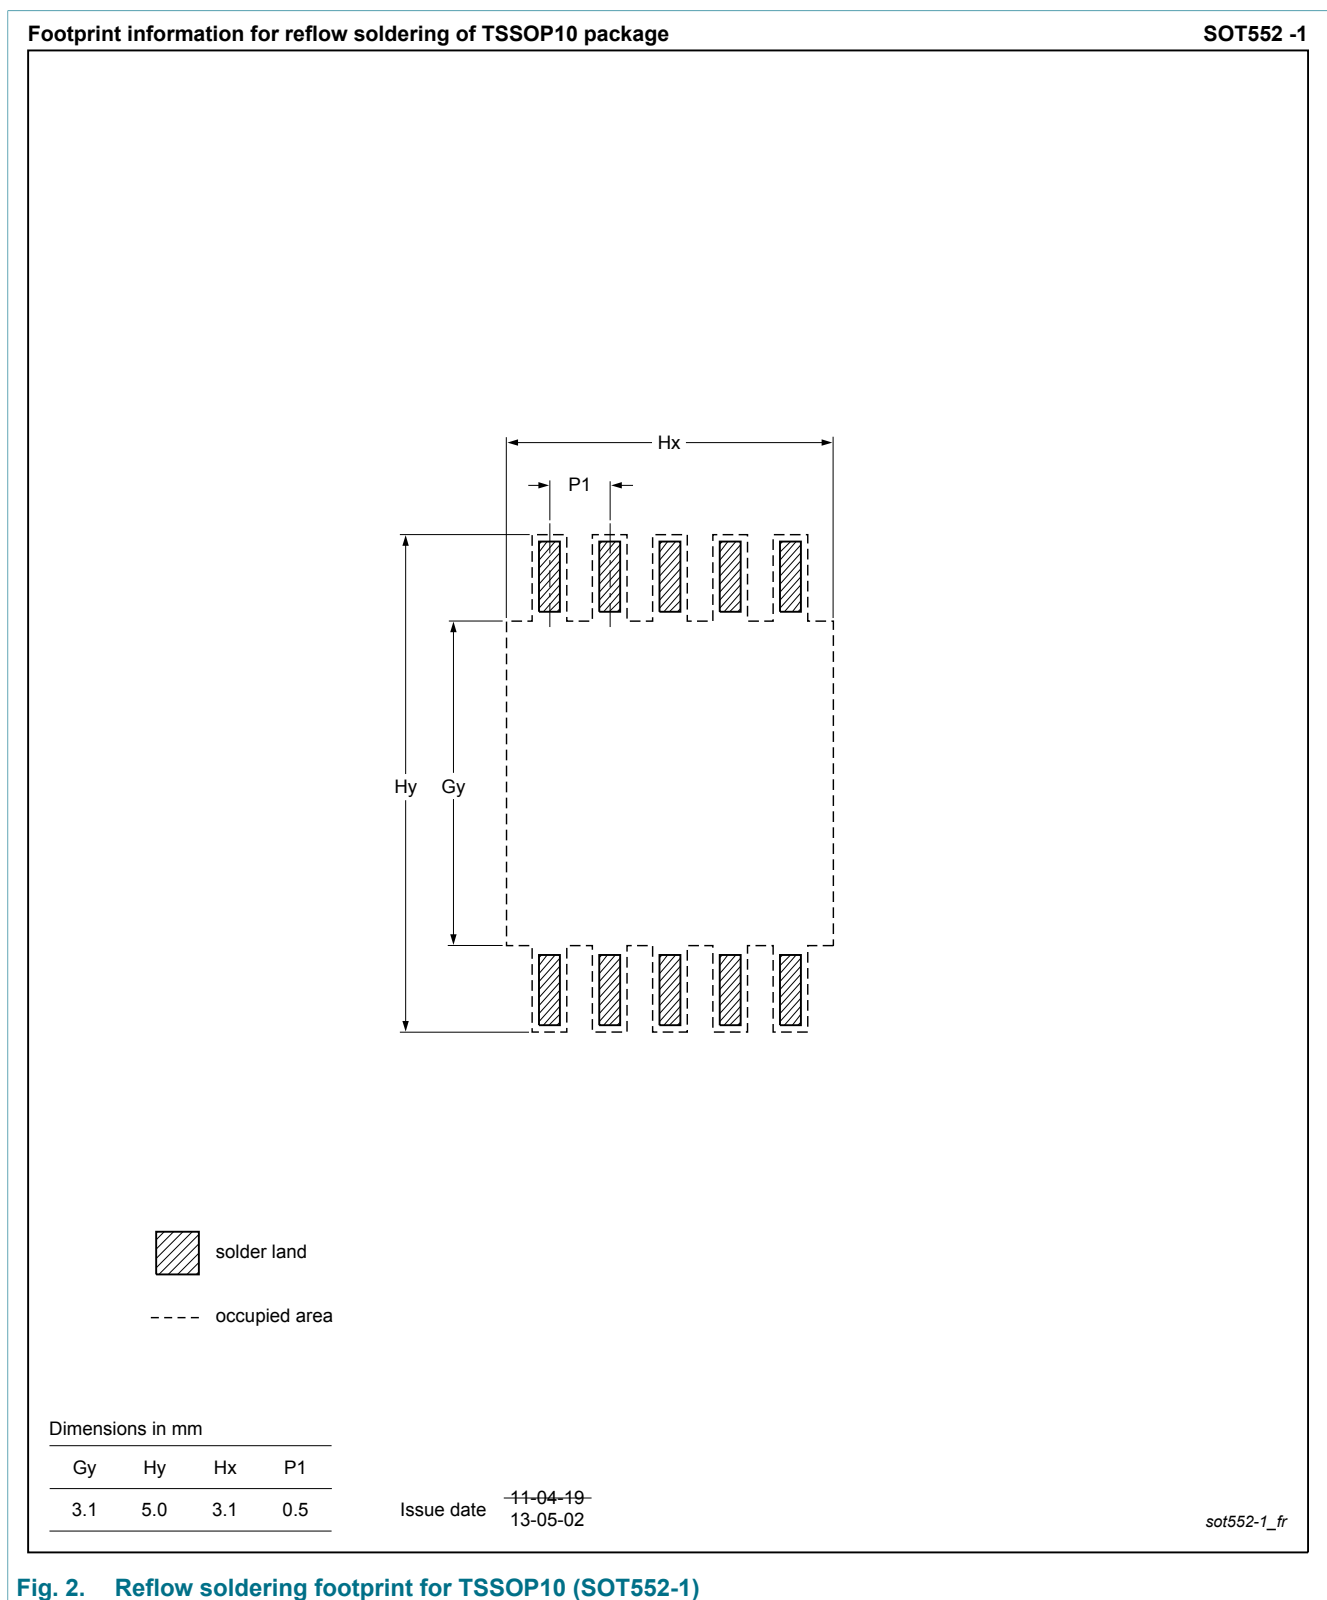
Reflow soldering footprint for TSSOP10 (SOT552-1)
